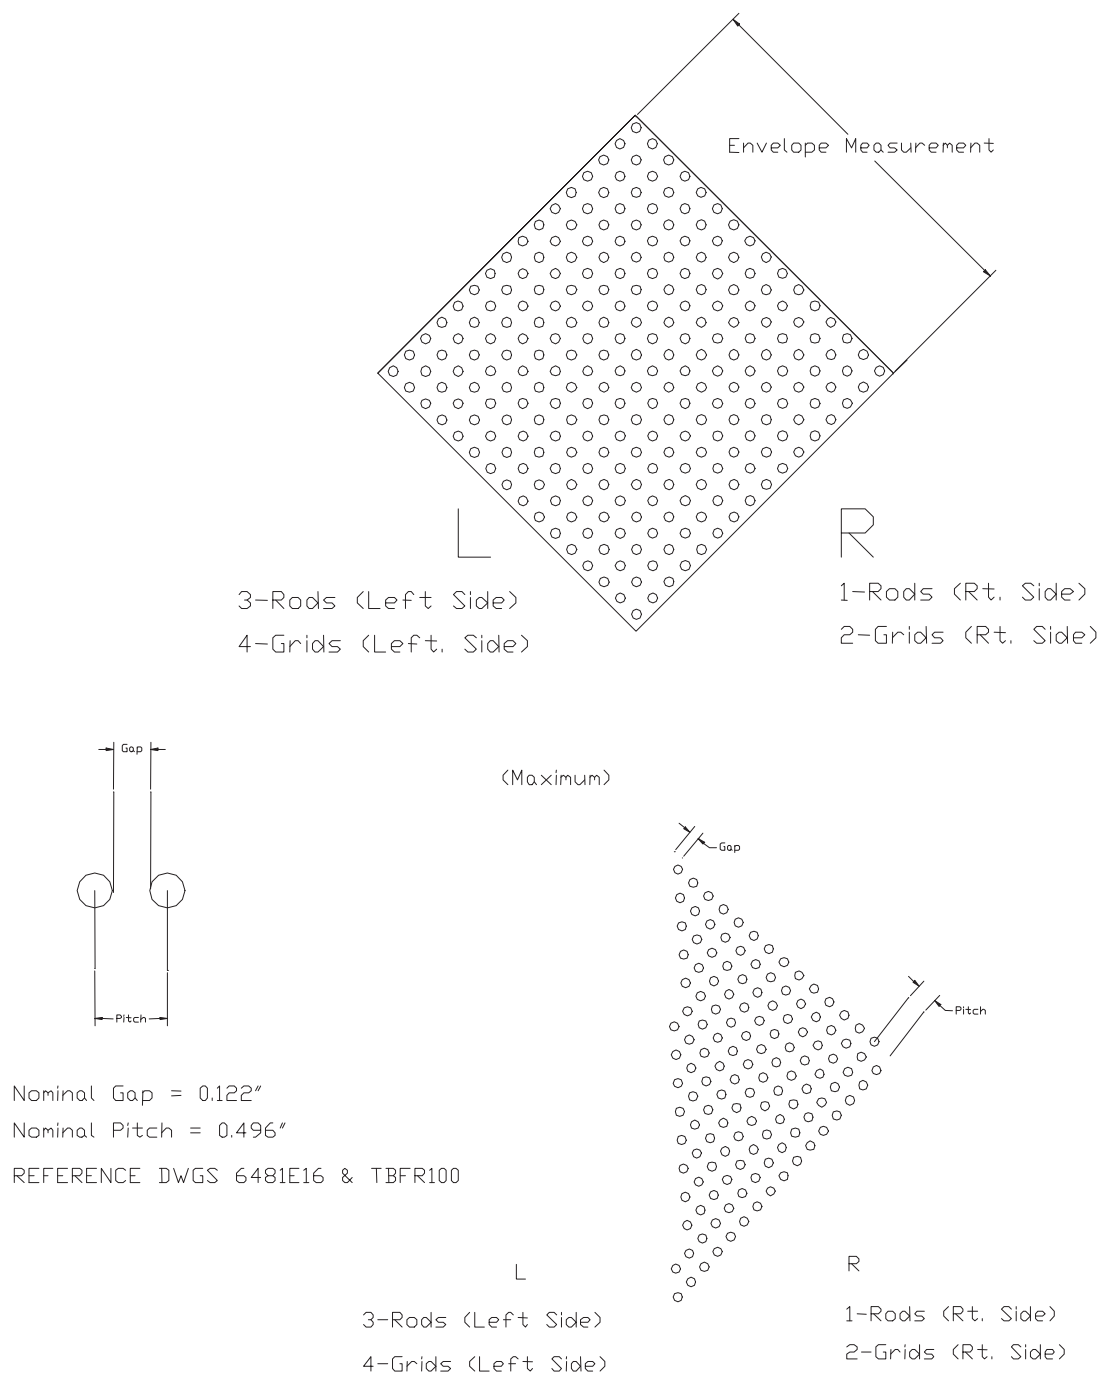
Measurements Made on QTU-1 Fuel Assemblies Before and After Drop Tests
